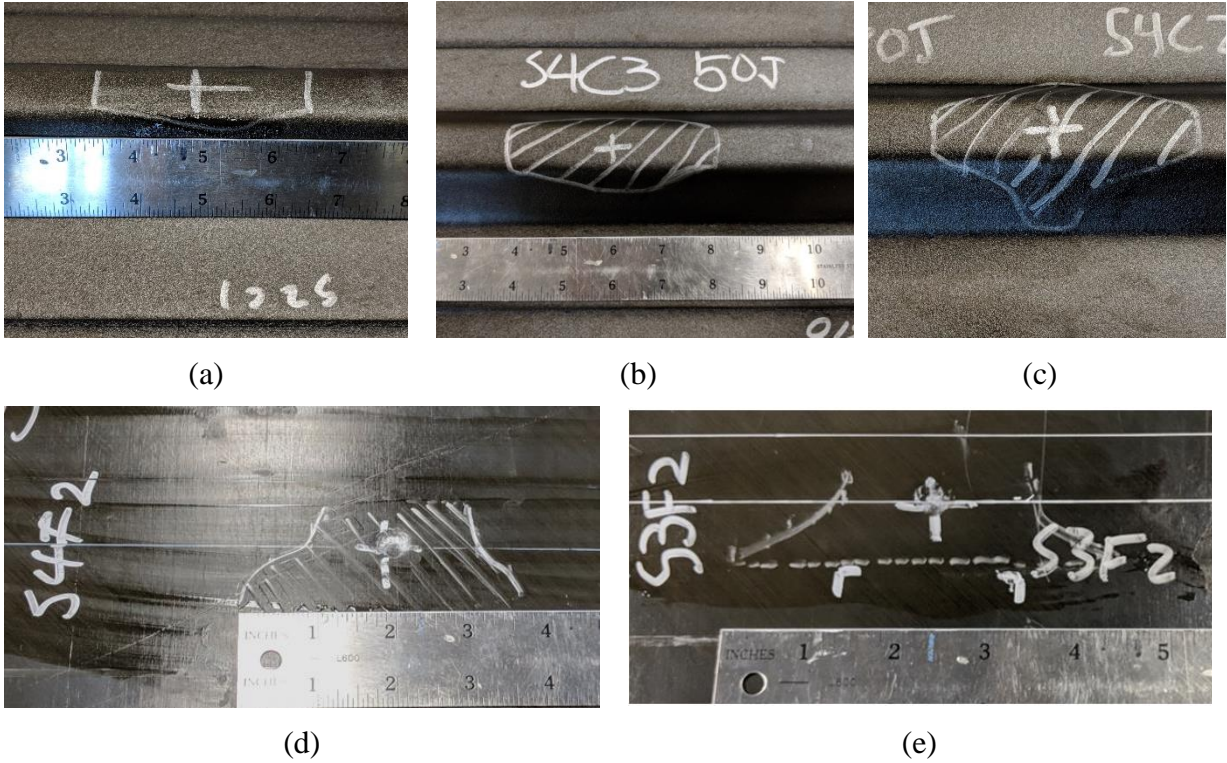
Hand-held UT scan for cap impact damage for (a) 28 J, (b) 47 J and (c) 66 J, and flange impact damage for (d) 65 J and (e) 83 J
